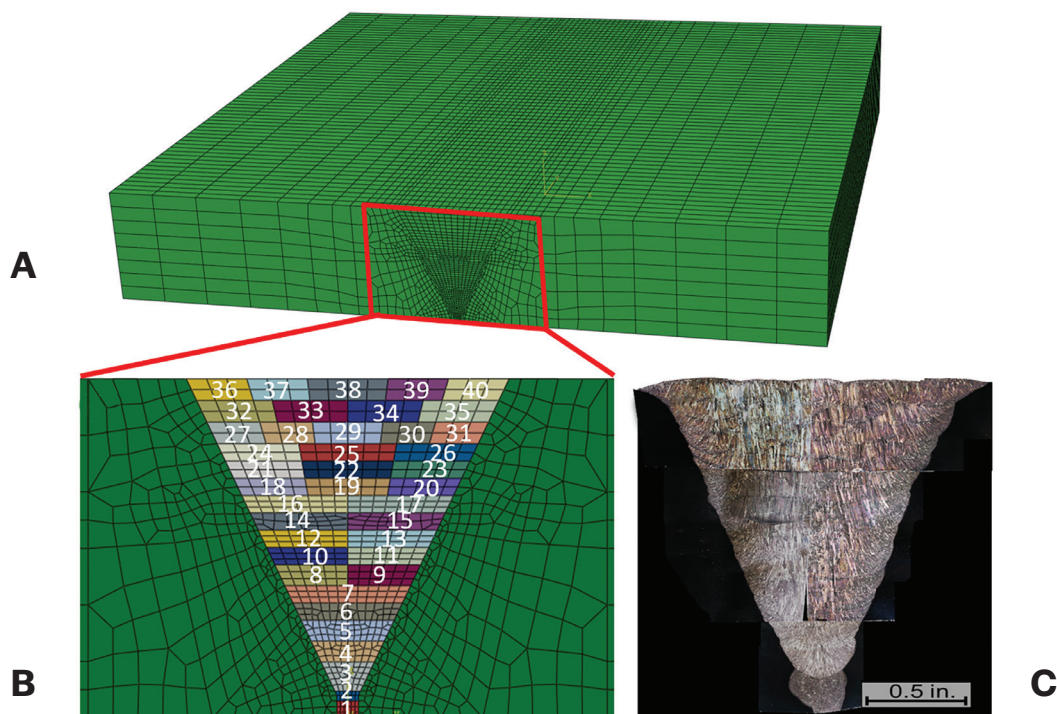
A – Finite element model (FEM) mesh of the 12 × 12-in. plate; B – meshes of the weld zone with different colors representing the element sets of each weld pass; C – cross-sectional macrograph of the weld zone.
